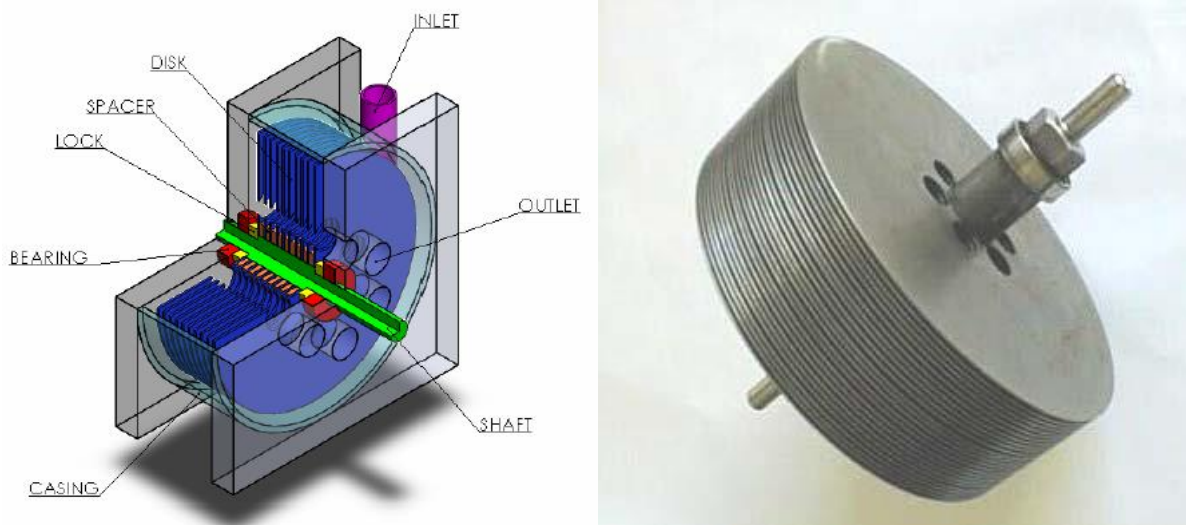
a) A cut-away view of a Tesla turbine Assembly Consisting Basic Parts b) An Actual Disk Turbine Assembly without Shroud Covering [6]
